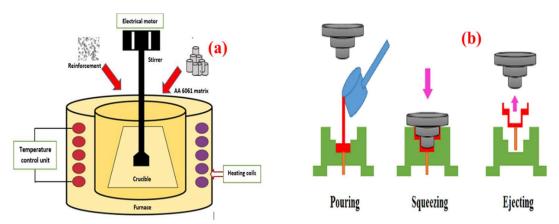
Schematic illustration of (a) stir casting [27] and (b) squeeze casting techniques [28].
